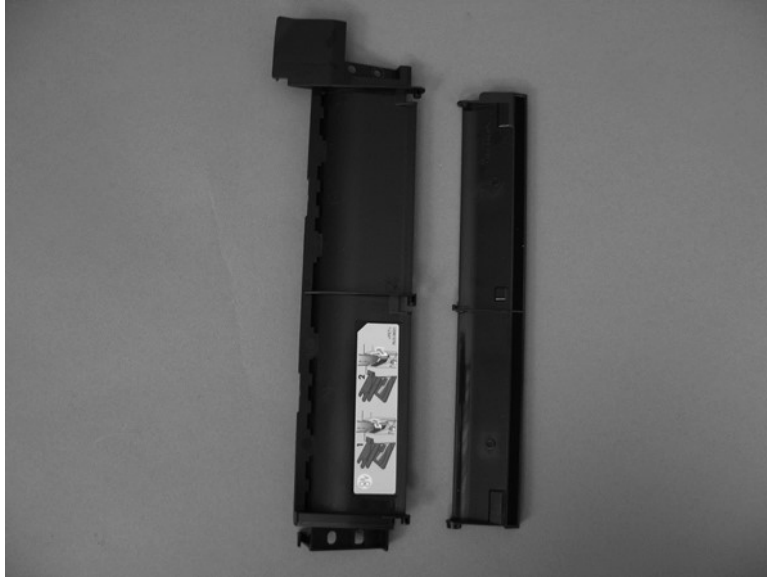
Remove the flapper guide assembly (stapling mailbox)
